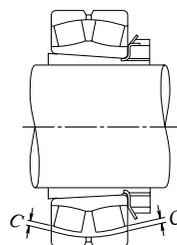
Clearance Measurement of Spherical Roller Bearing
